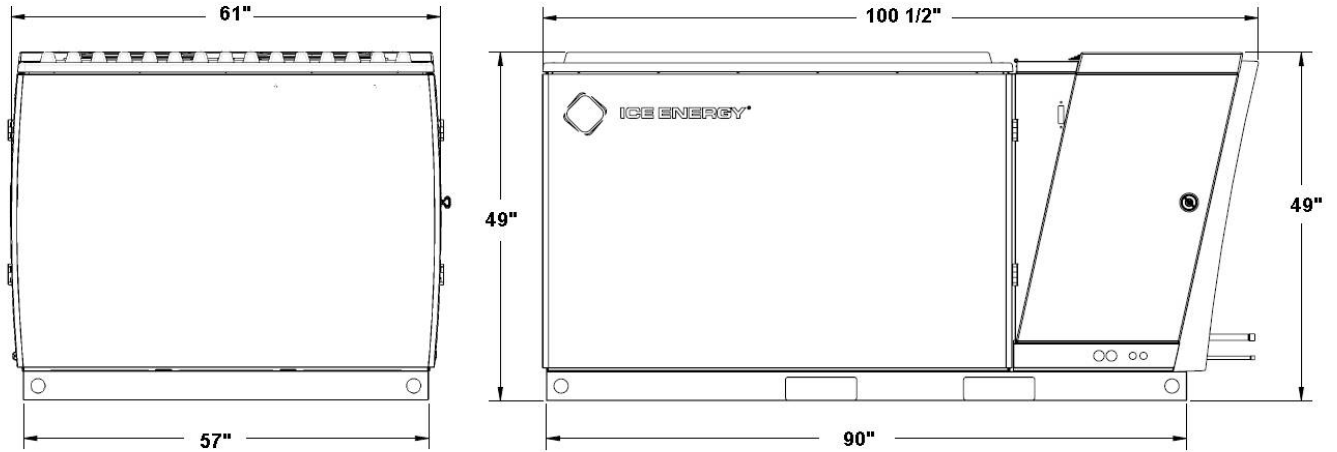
Ice Bear<sup>®</sup> 30 Unit Dimensions Rear & Side Views
